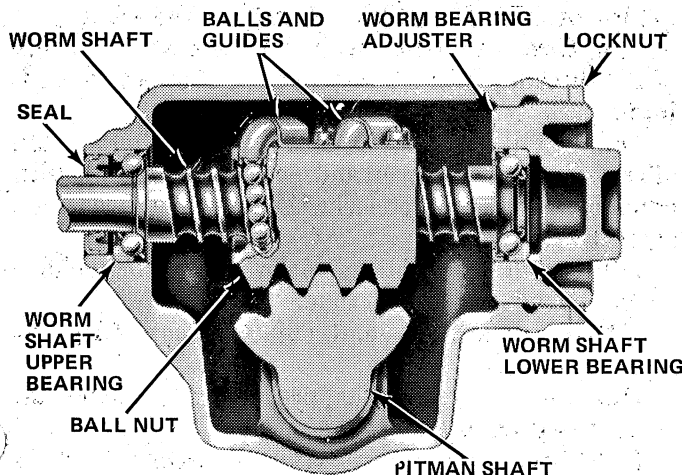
K-1 Recirculating Ball Manual Steering Gear
